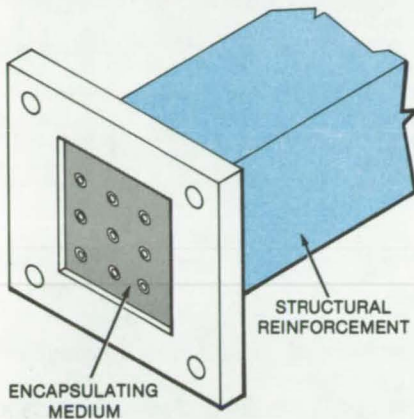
Structural Reinforcement, encapsulating medium, and wires would be common to members and fittings used for bearing structural loads.
